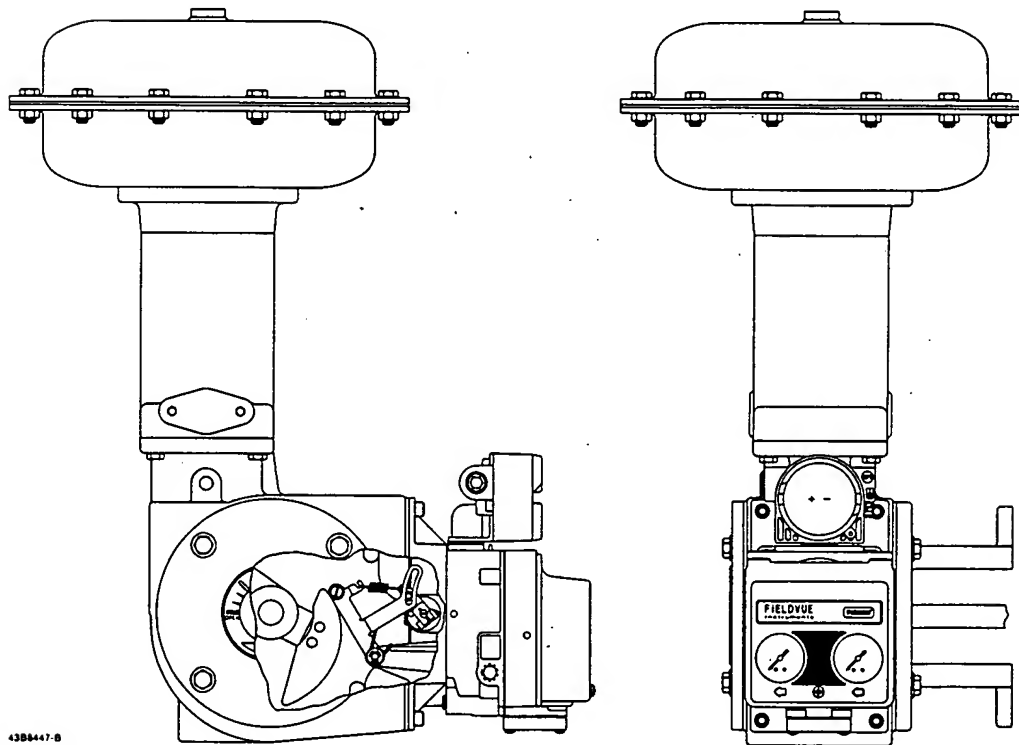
Type DVC5020 Mounted on Type 1051 Size 40 Actuator
